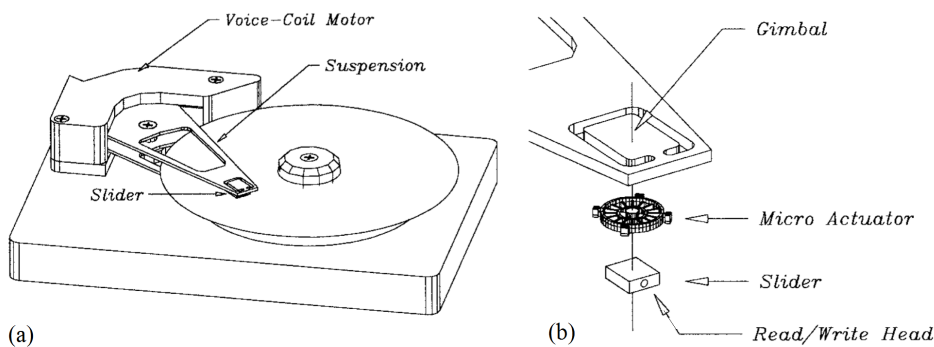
(a) The basic mechanical components of the conventional servo system (b) Exploded view of microactuator/slider assembly [71].
